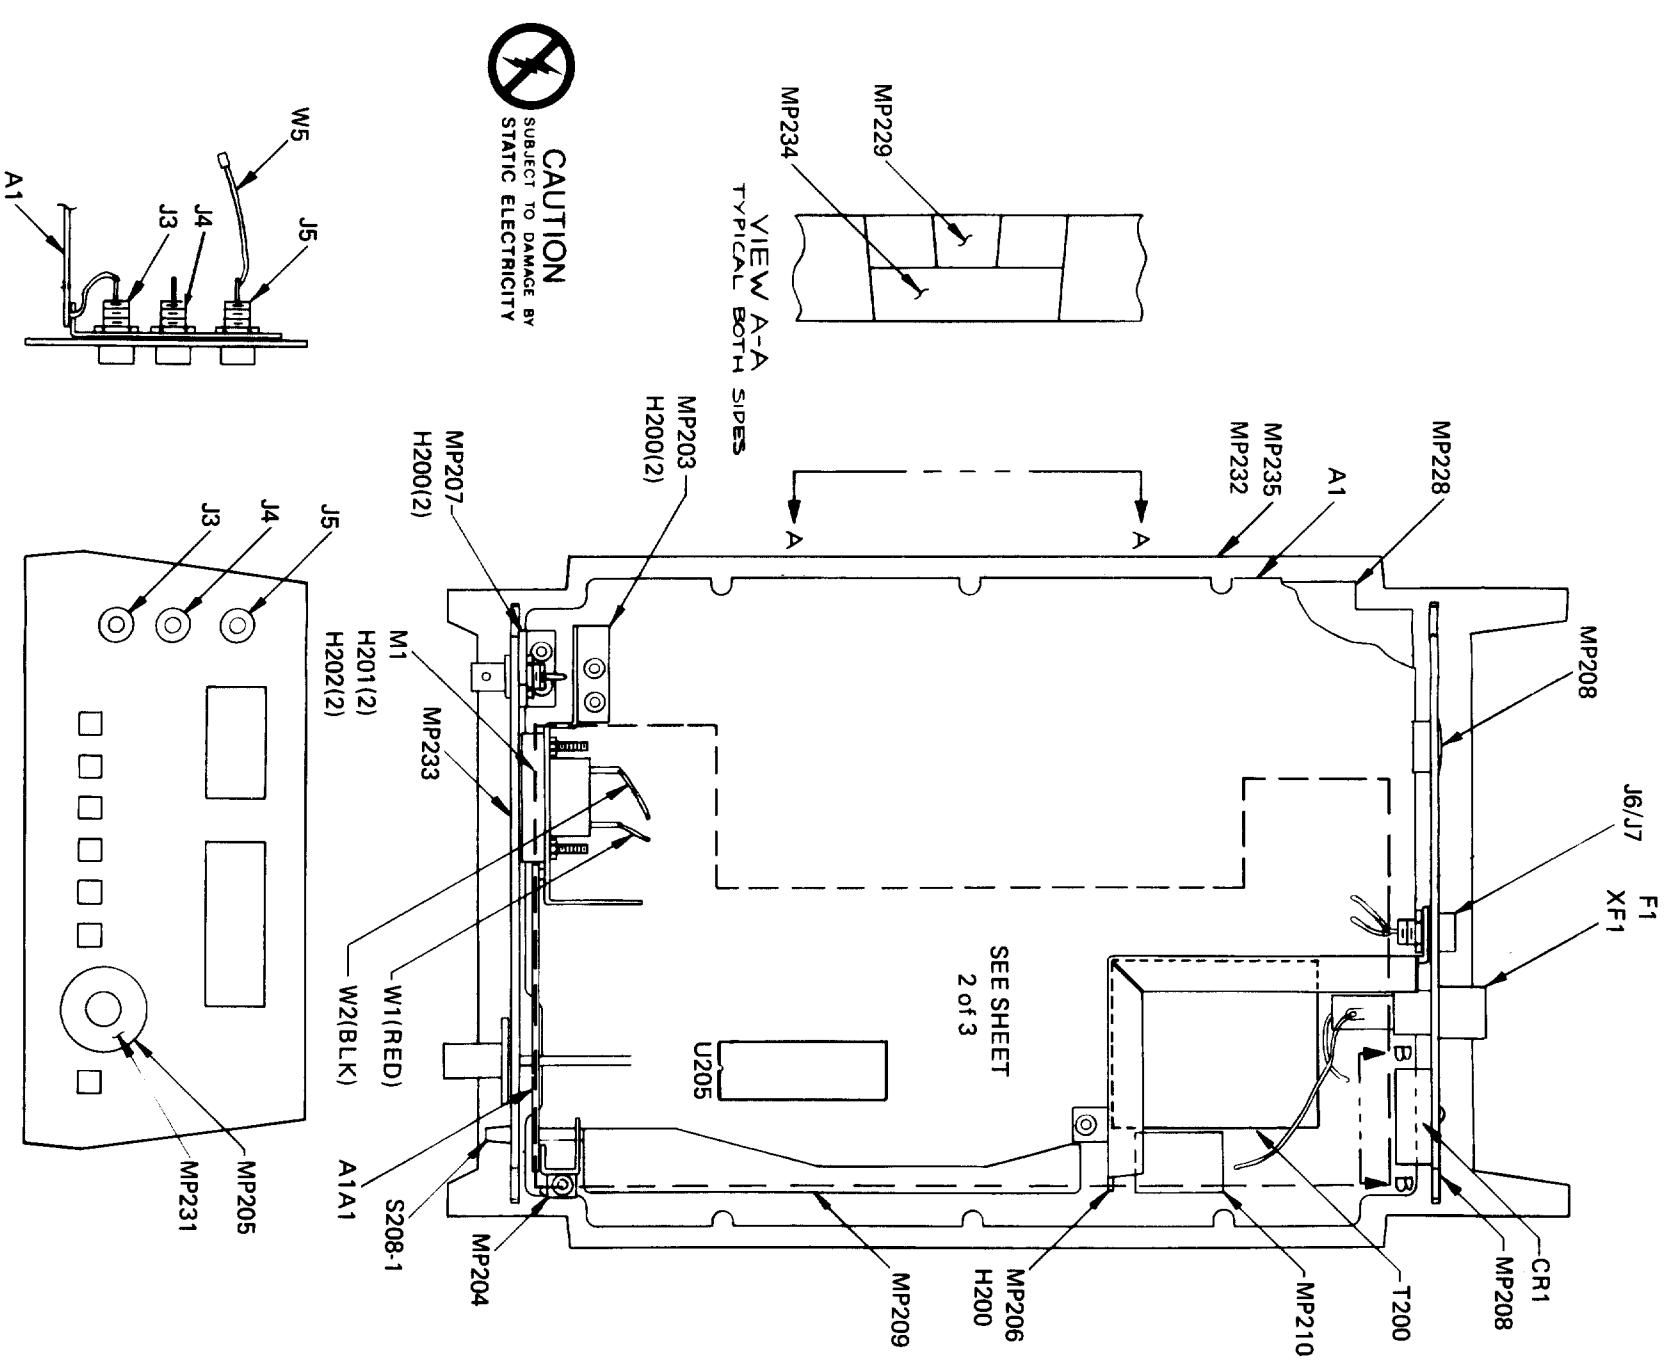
A1 8921A Main PCB Assembly (Sht 1 of 3)
